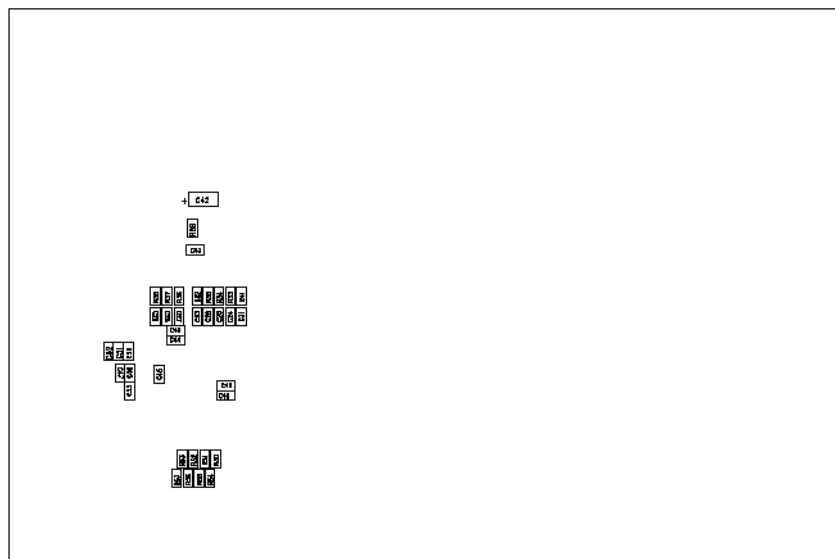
UCD3138OL64EVM-031 Bottom Assembly Drawing (bottom view)
